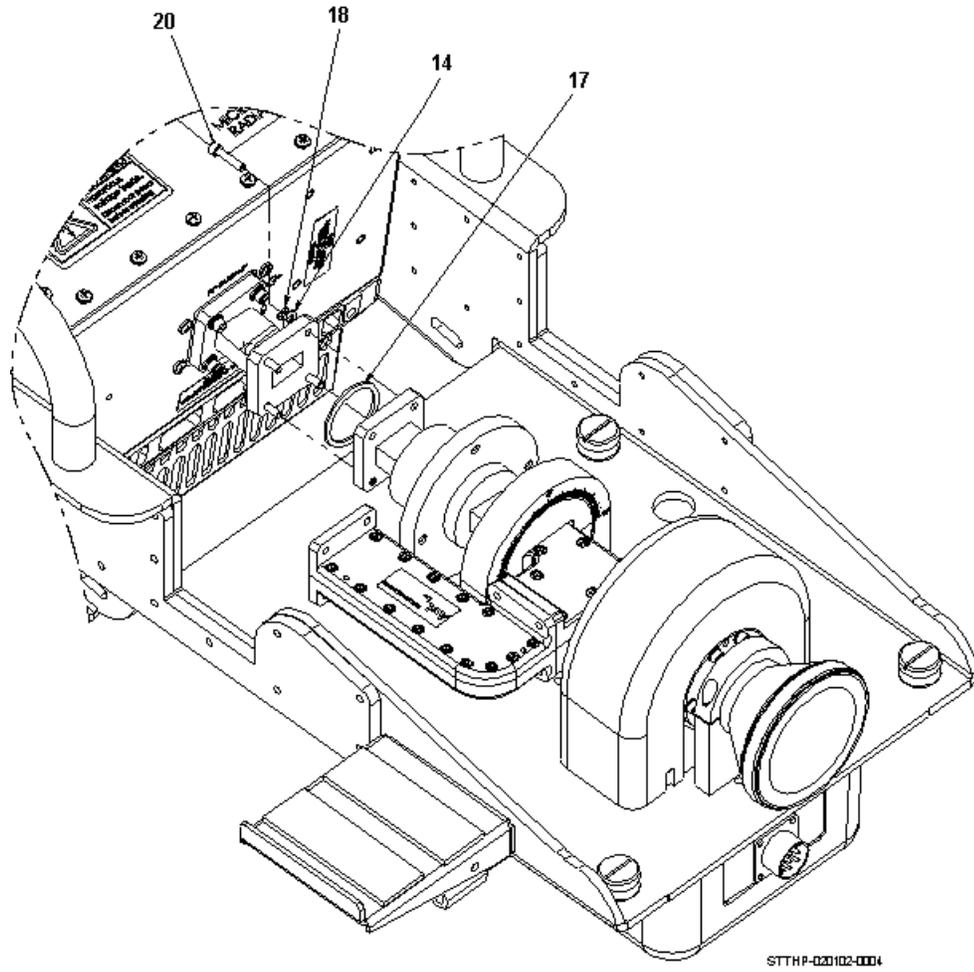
Feed Assembly, KU Band - Group 020102 (Sheet 4 of 6).
